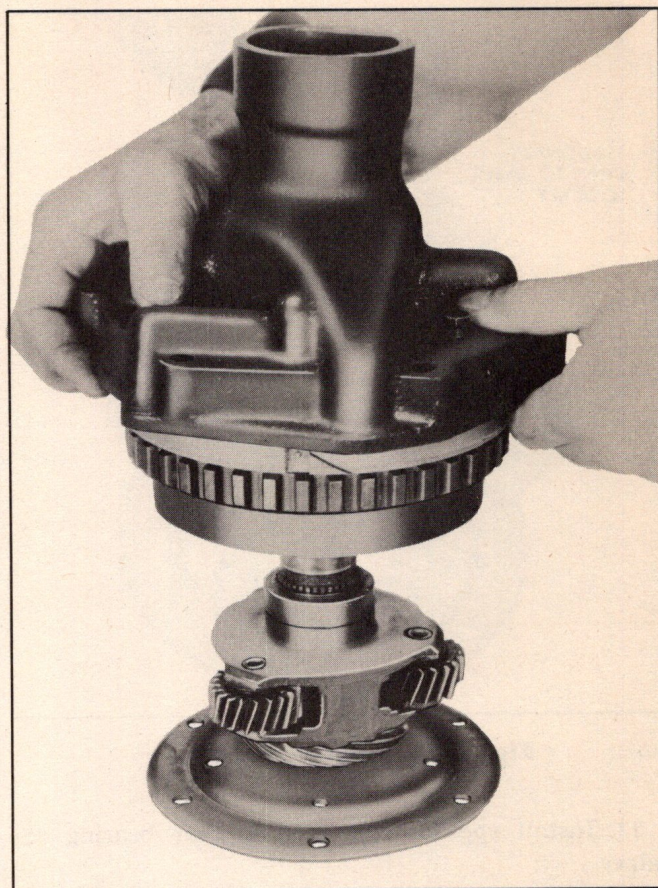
Installing Rear Bearing Retainer on Output Shaft
